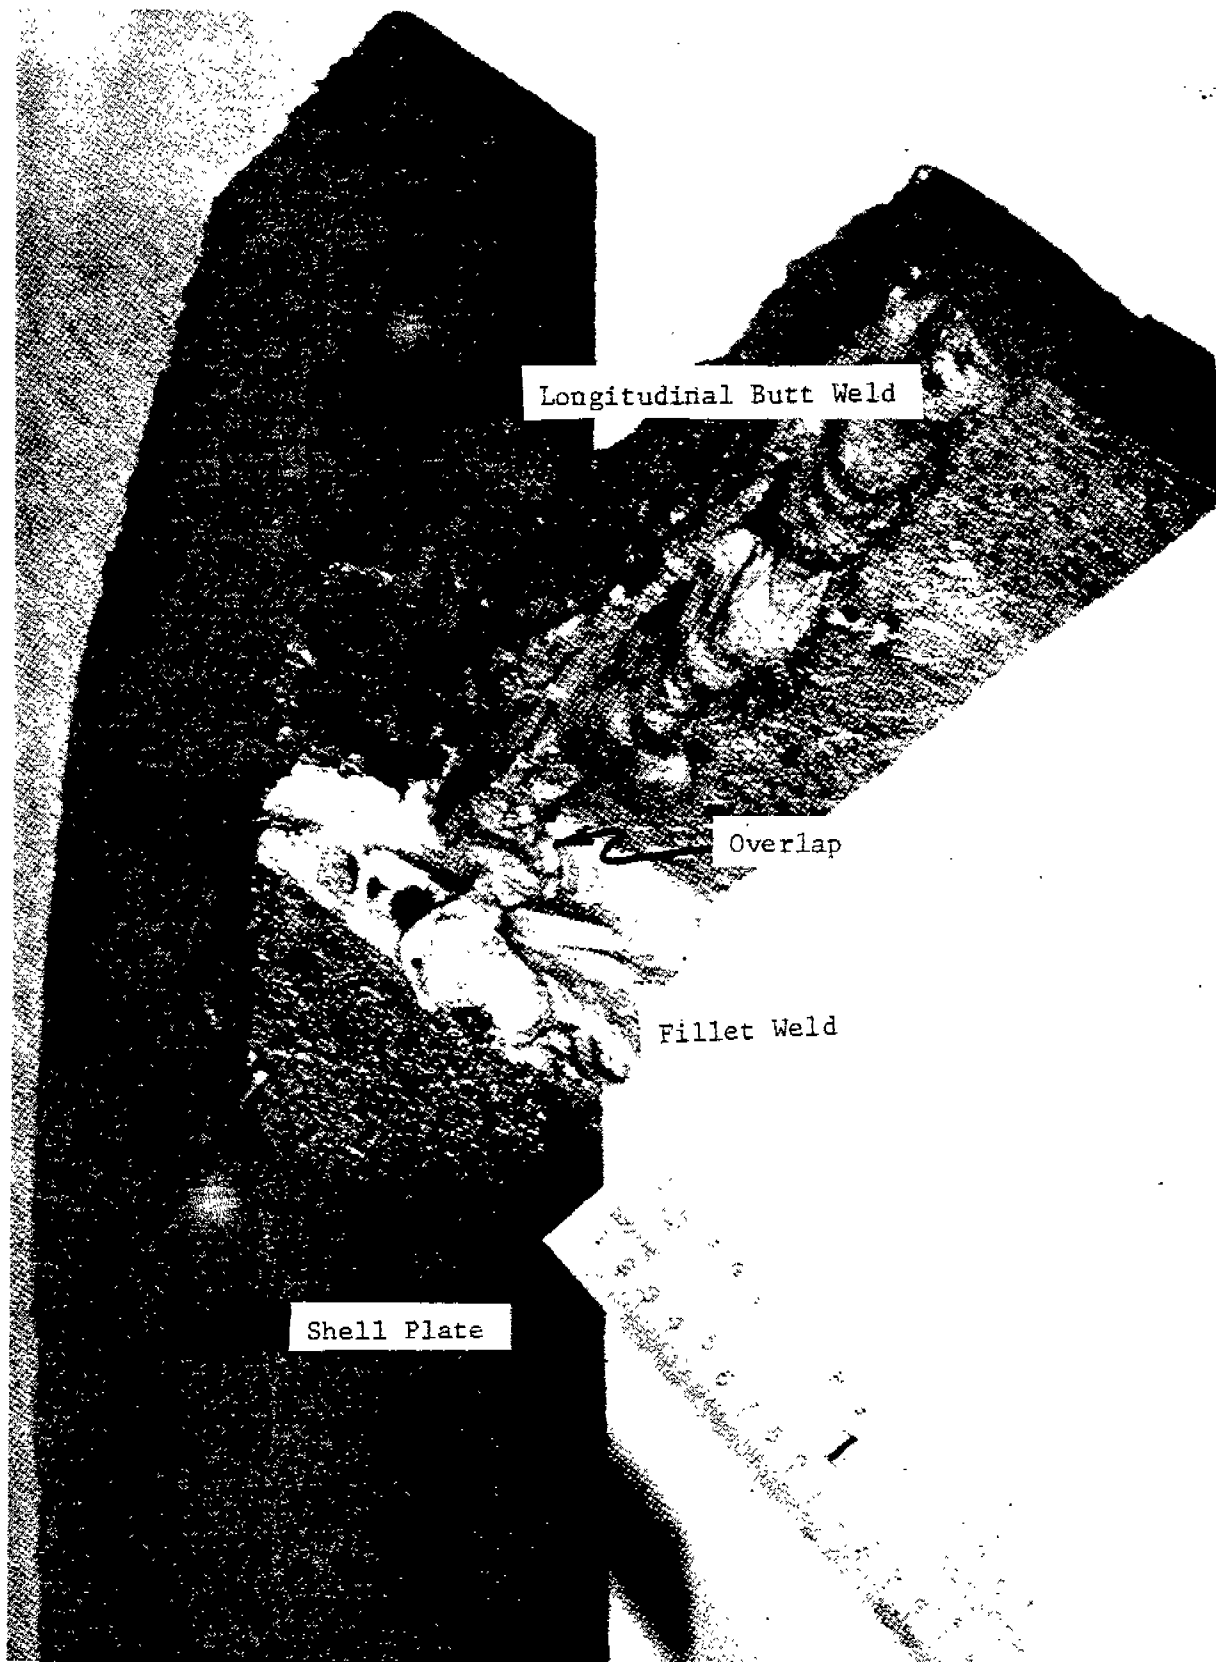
Weld joint of longitudinal to shell plate looking at underside of the longitudinal butt weld. Note overlap of butt weld onto fillet weld. Specimen No. 3908; Magn. 1.9x.
